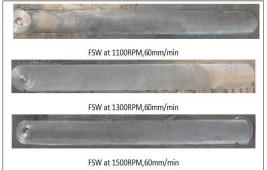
The appearance of upper surface of welding beads of 6061-T6 AA plates produced by FSW.
